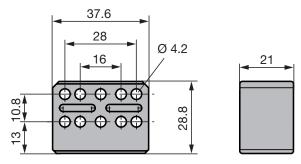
Installation dimensions of BTL6-A-3800-2 magnet
